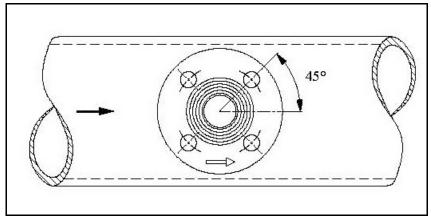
Mounting a 4-bolt-hole flanged mounting stud
